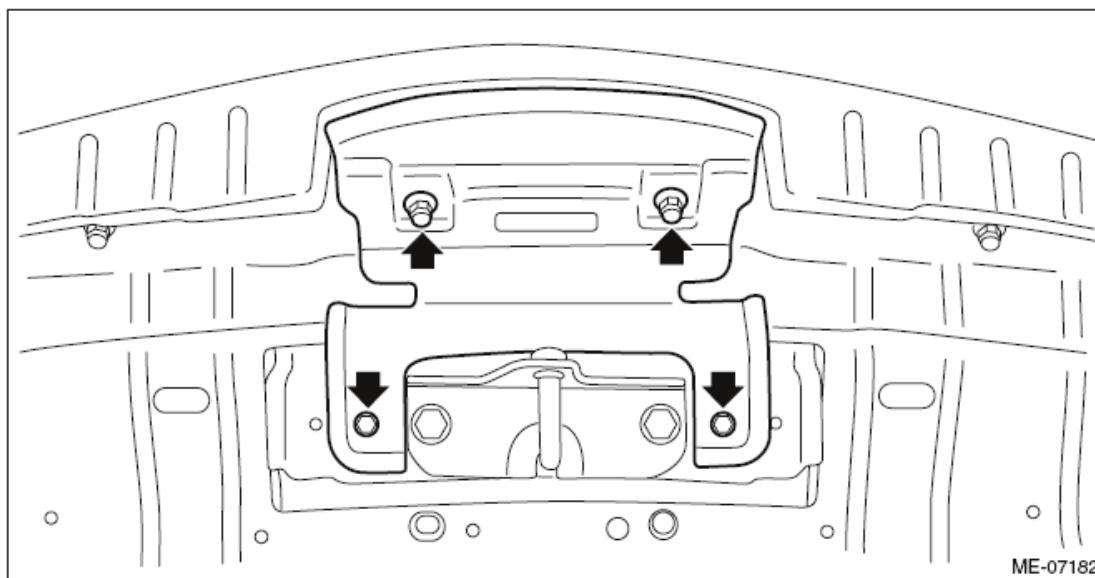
Locating Upper Grille Bracket To Front Hood Nut And Bolts
